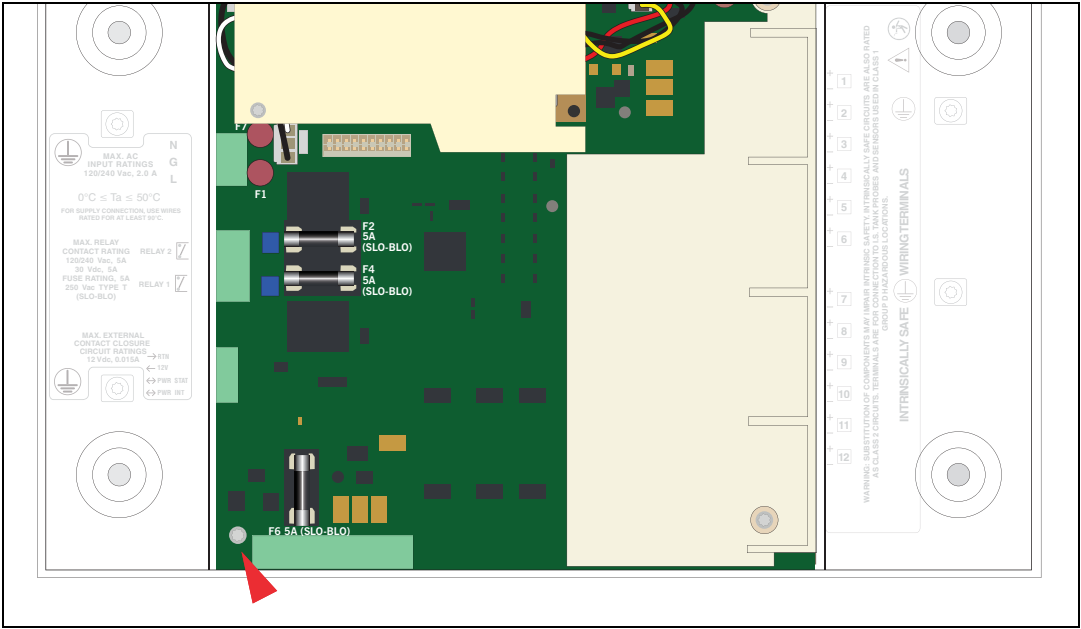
Remove Lower Left Corner USIOM Board T15 Screw
